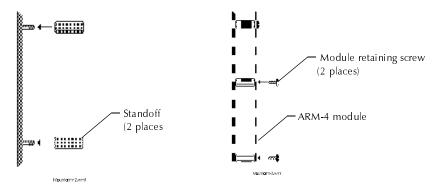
Mounting an ARM-4 to a CHS-4 Chassis
